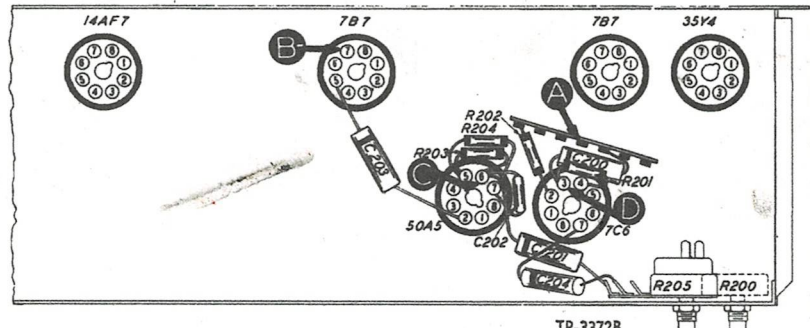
BOTTOM VIEW, SHOWING SECTION 2 TEST POINTS.
